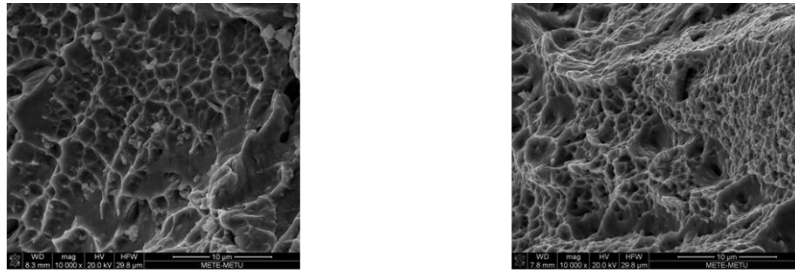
Fracture surfaces of the heat treated Inconel 718 alloys tested at 800 °C
